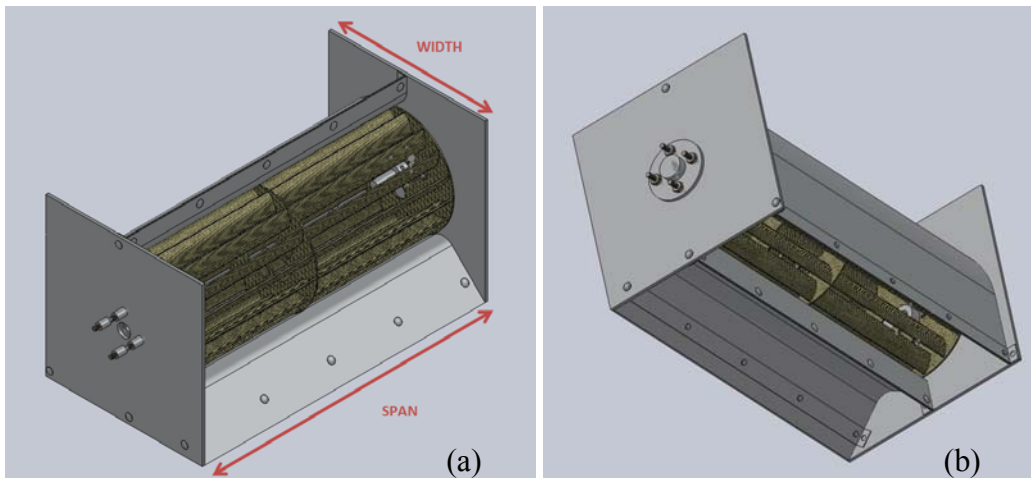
Inlet (a) and outlet (b) views of CFF concept
